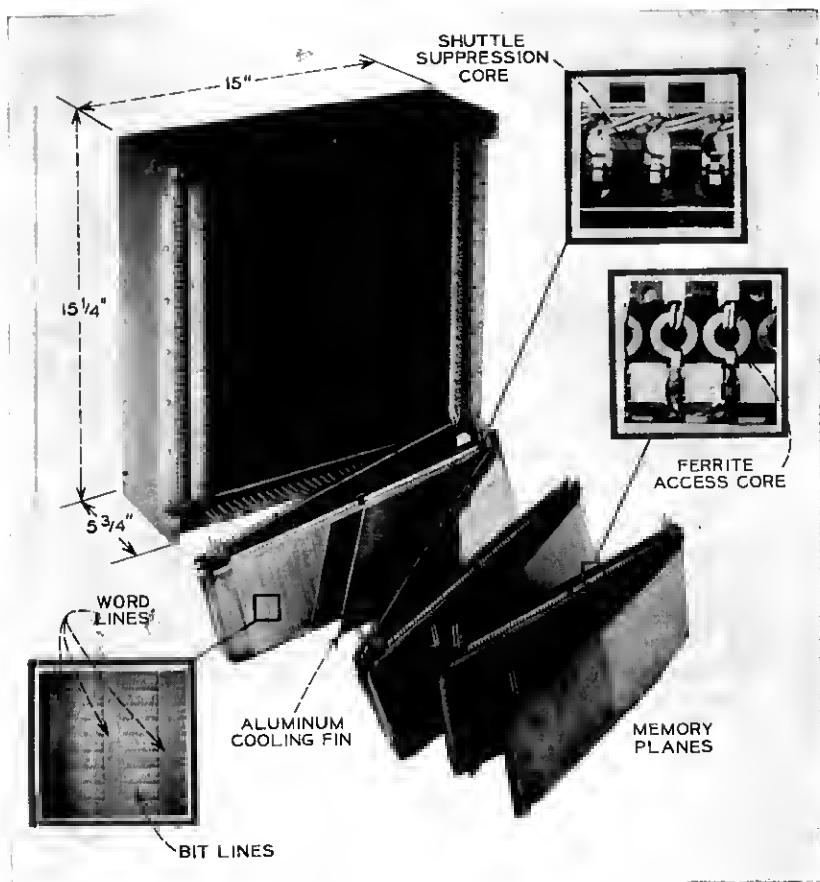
Photograph of a 15B Memory module in the background and an unfolded section of a module in the foreground showing the 64-word plane assembly and the continuous bit line cable. Inserts are expanded views of the twistor wire, access core, and shuttle suppression core.
